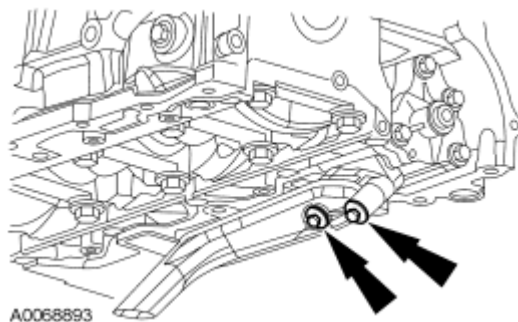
Locating Oil Pump Pickup Tube Bolts
